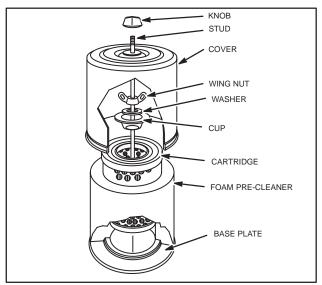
DUAL ELEMENT, HORIZONTAL AND VERTICAL CRANKSHAFT
